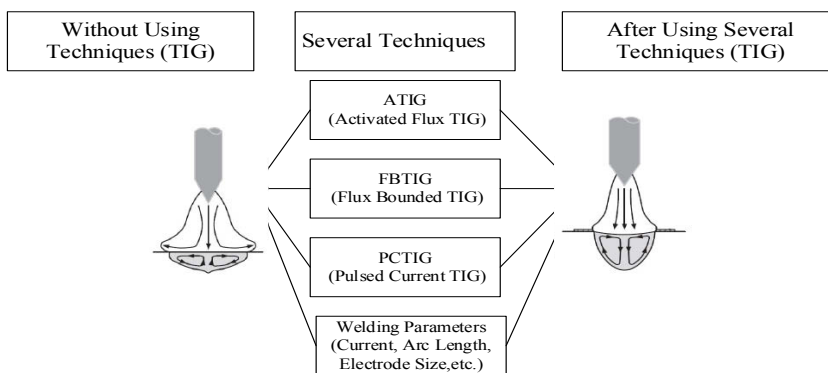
shows several methods to increase the penetration in TIG welding
